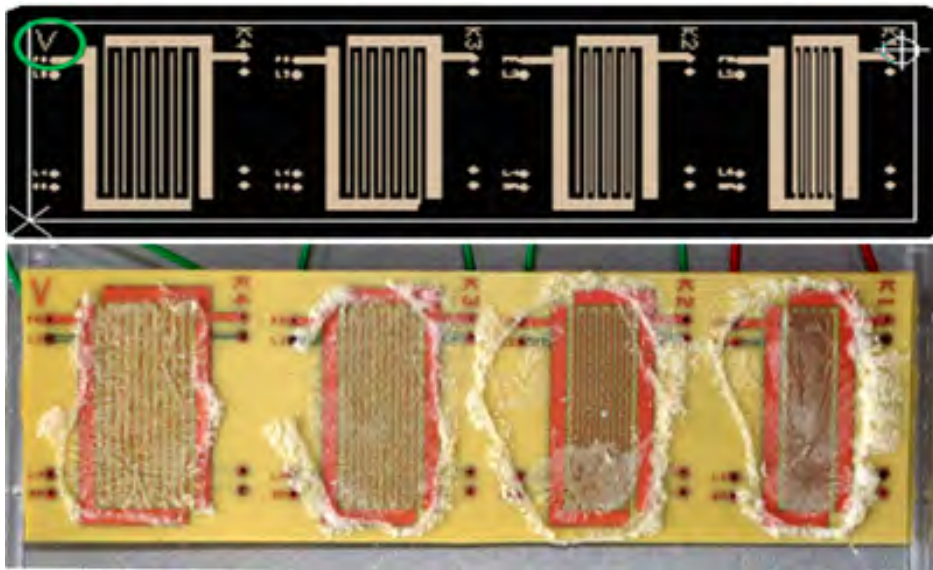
PCB coupons, engineering concept and real platine superposed by NaCl.
